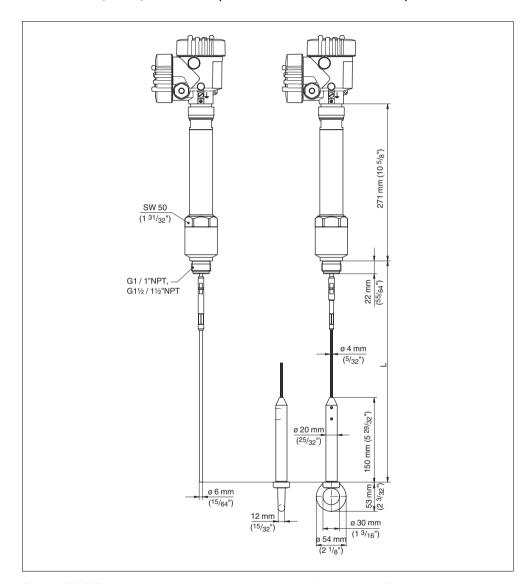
VEGAFLEX 67, cable, rod version with thread (-110 ... +400 °C/-166 ... +752 °F) L Sensor length, see "Technical data"
